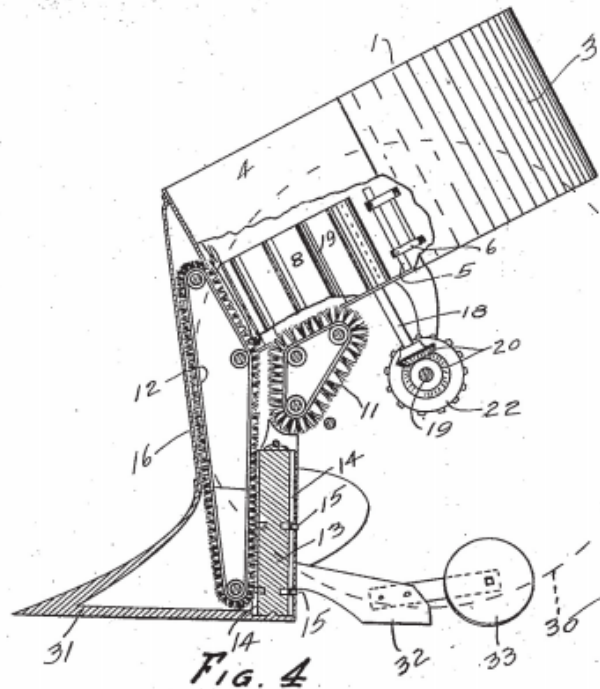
shows a sectional side elevation view of Gould's plant-setting machine. *Id.* at 1:38.
